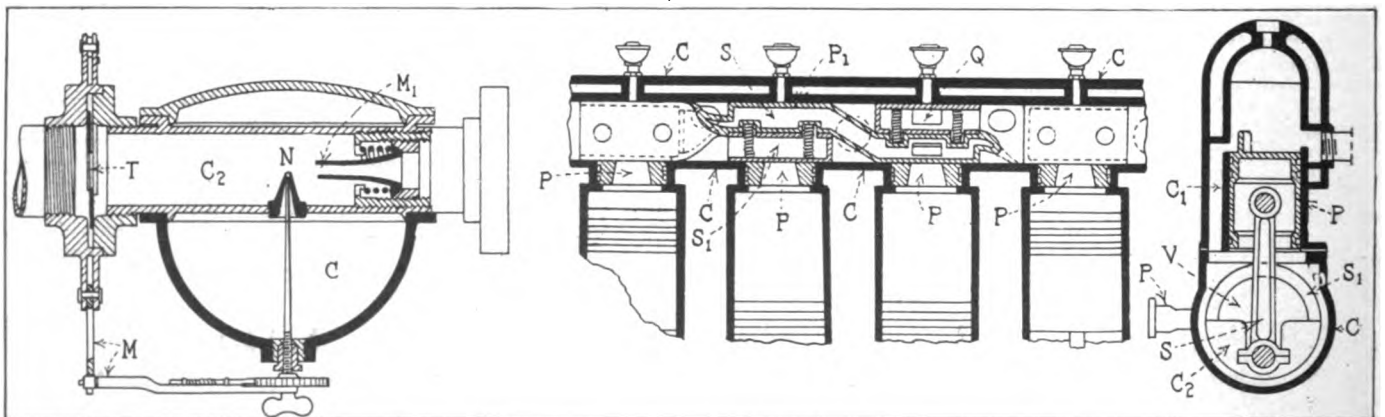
Sliger carbureter. Fig. 3—Moorhead rotary cylinder-plug valve. Fig. 4—Richman internal combustion engine
